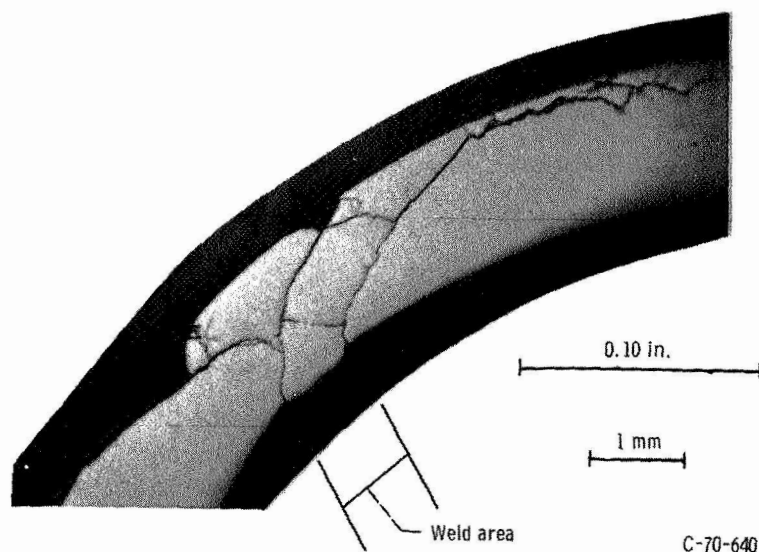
Section view showing typical cracks between the weld area and the outside surface of the ball. Section taken parallel to and through the running track.
